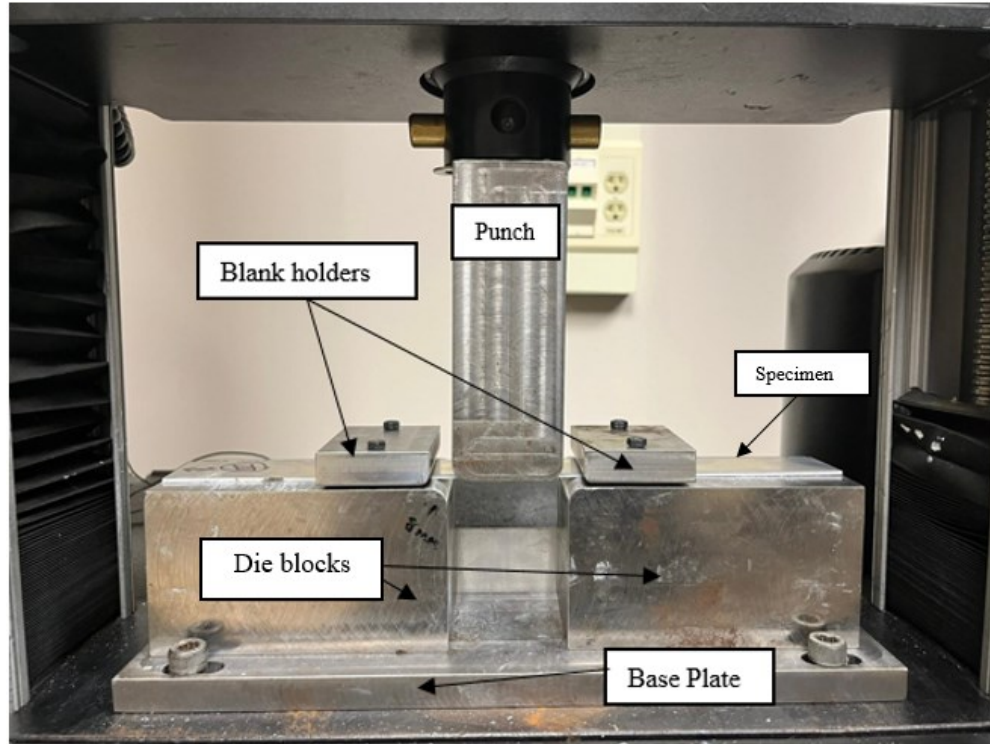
Experimental draw bending tool setup installed on Instron testing machine
